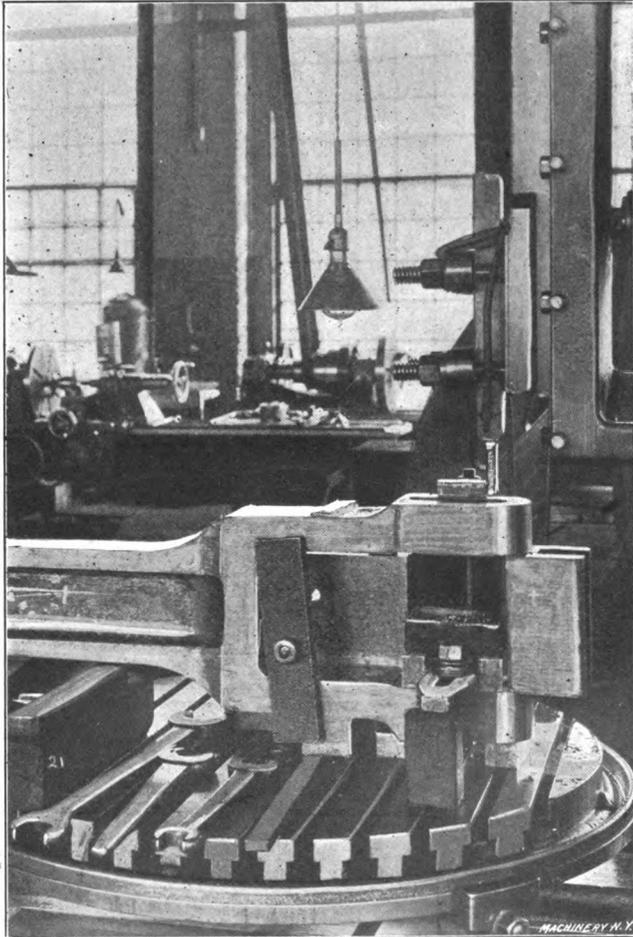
Working out the Keybolt Slot on the Slotting Machine
